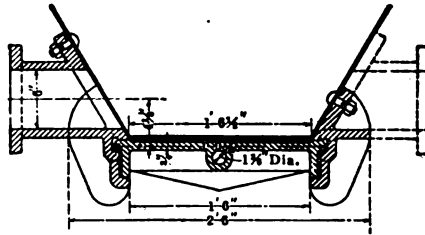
CROSS-SECTION OF HORIZONTAL FILTER-VAT DISCHARGE DOOR.
